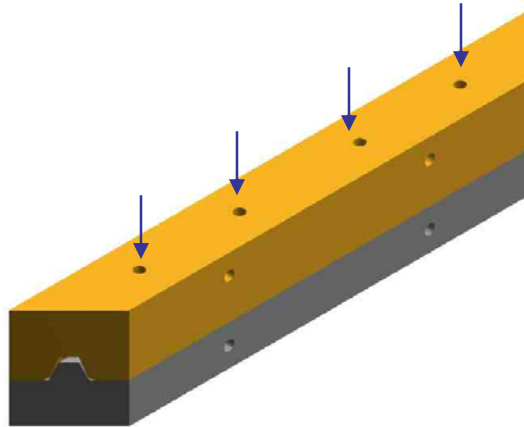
CAD model showing one side of the gripping device. The blue arrows show the location of the holes for the bolts.
